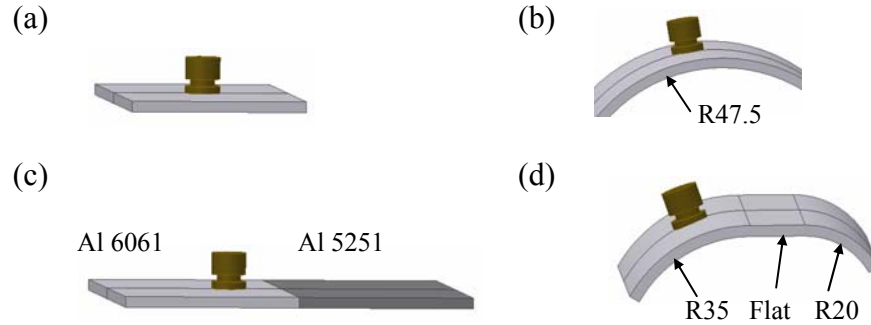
FSW workpieces of (a) Al 6061 flat plate weld, (b) Al 6061 round tube weld, (c) flat plate with changing material and (d) Al 6061 plate with changing curvature.
